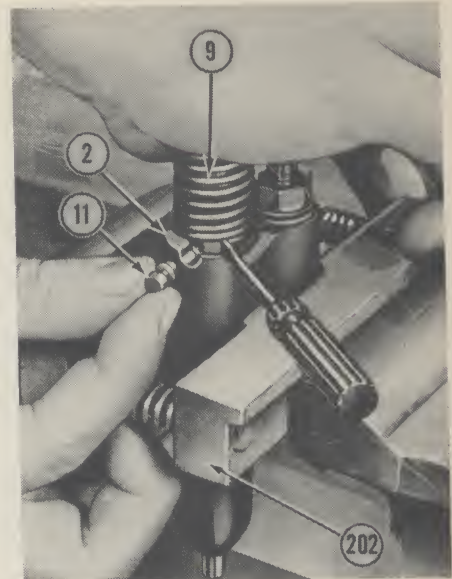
B—Showing method of removing stop pin (11) to remove injector plunger.
